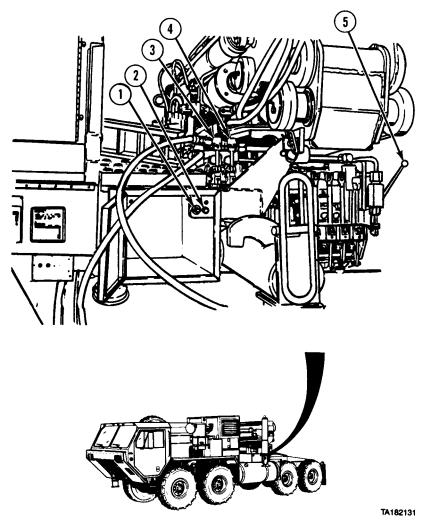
M983 Crane Main Control Panel (Sheet 1 of 2).
